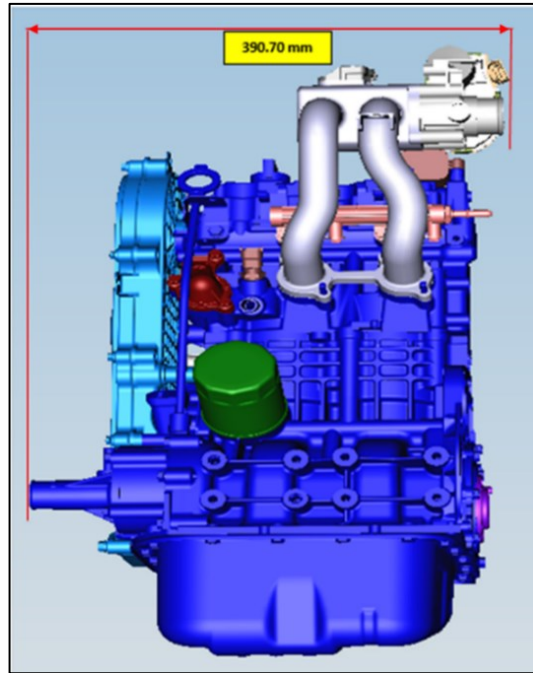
Base engine with bespoke inlet manifold, reduction in overall package width from 553.15mm to 390.70mm, courtesy TMETC
